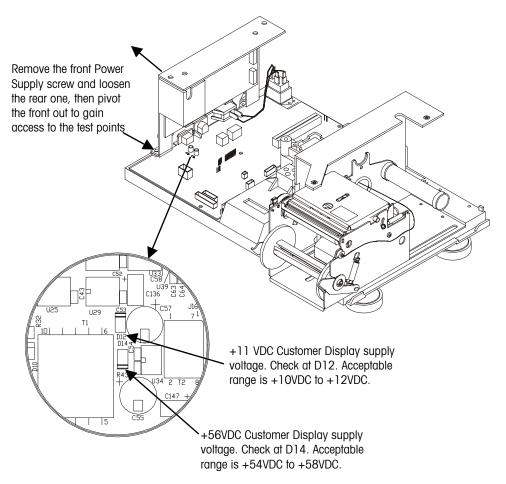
+56VDC and +11VDC Test Points on Main PCB
